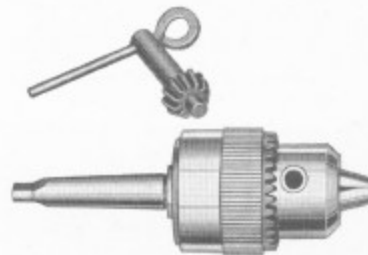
$\frac{3}{4}$ -inch capacity 3-jaw drill chuck for headstock spindle of the lathe.
